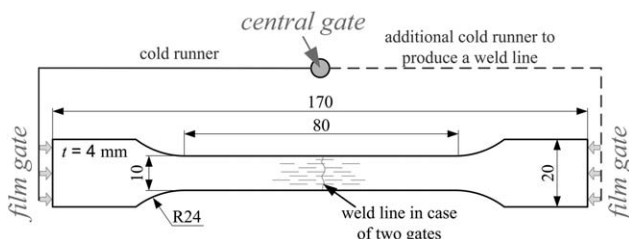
Specimen type 2: sampling and dimensions of injection moulded standardized testing specimens in mm, produced with and without weld lines.
